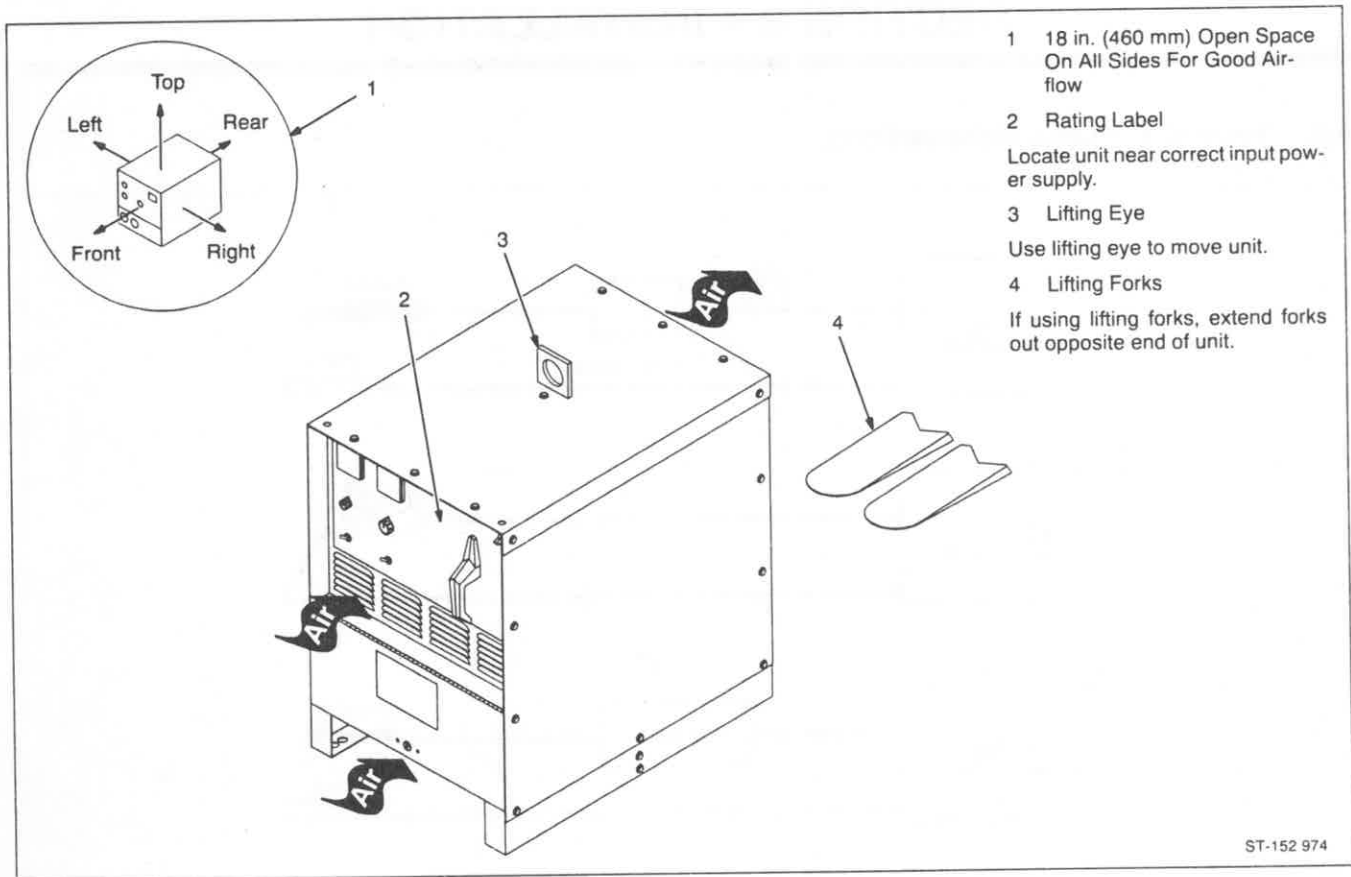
Location and Movement Of Welding Power Source
